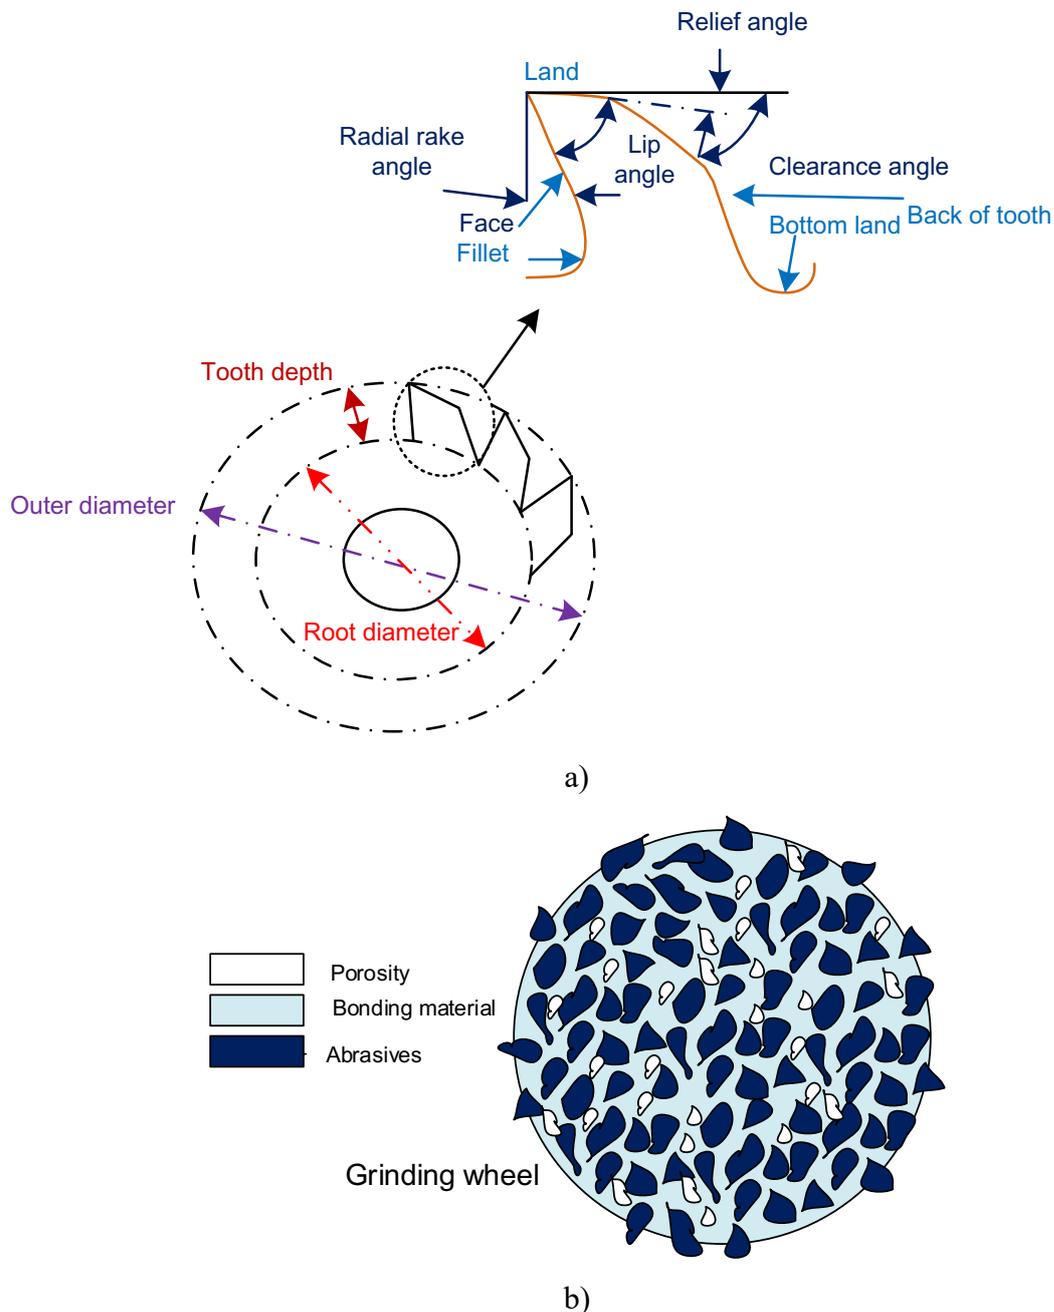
Schematic diagram of multi-point cutting tools a) milling cutter and b) grinding wheel
